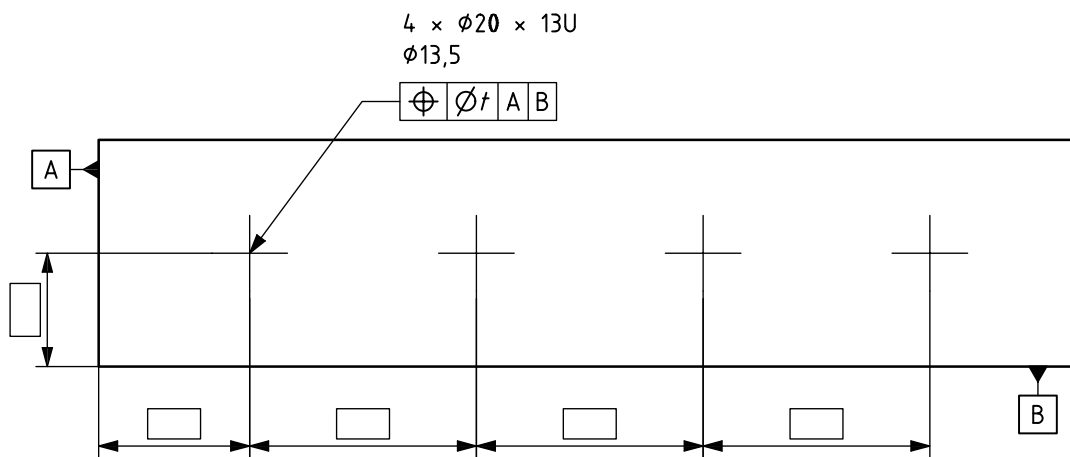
Simplified representation of group of four holes with counterbore using tolerance frame
